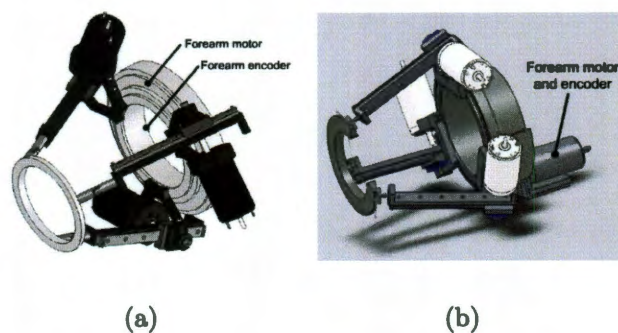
(a) Forearm mechanical design CAD model for MAHI Exo I. Forearm encoder ring ran along the circumference of the forearm and was prone to misalignment errors. A frameless brushless motor inside an aluminum encasing actuated the joint. (b) Forearm mechanical design CAD model for MAHI Exo II. Current design employs a Maxon DC motor with cable drive mechanism, and the encoder is coupled to the motor shaft at the bottom end (not shown in this model).
